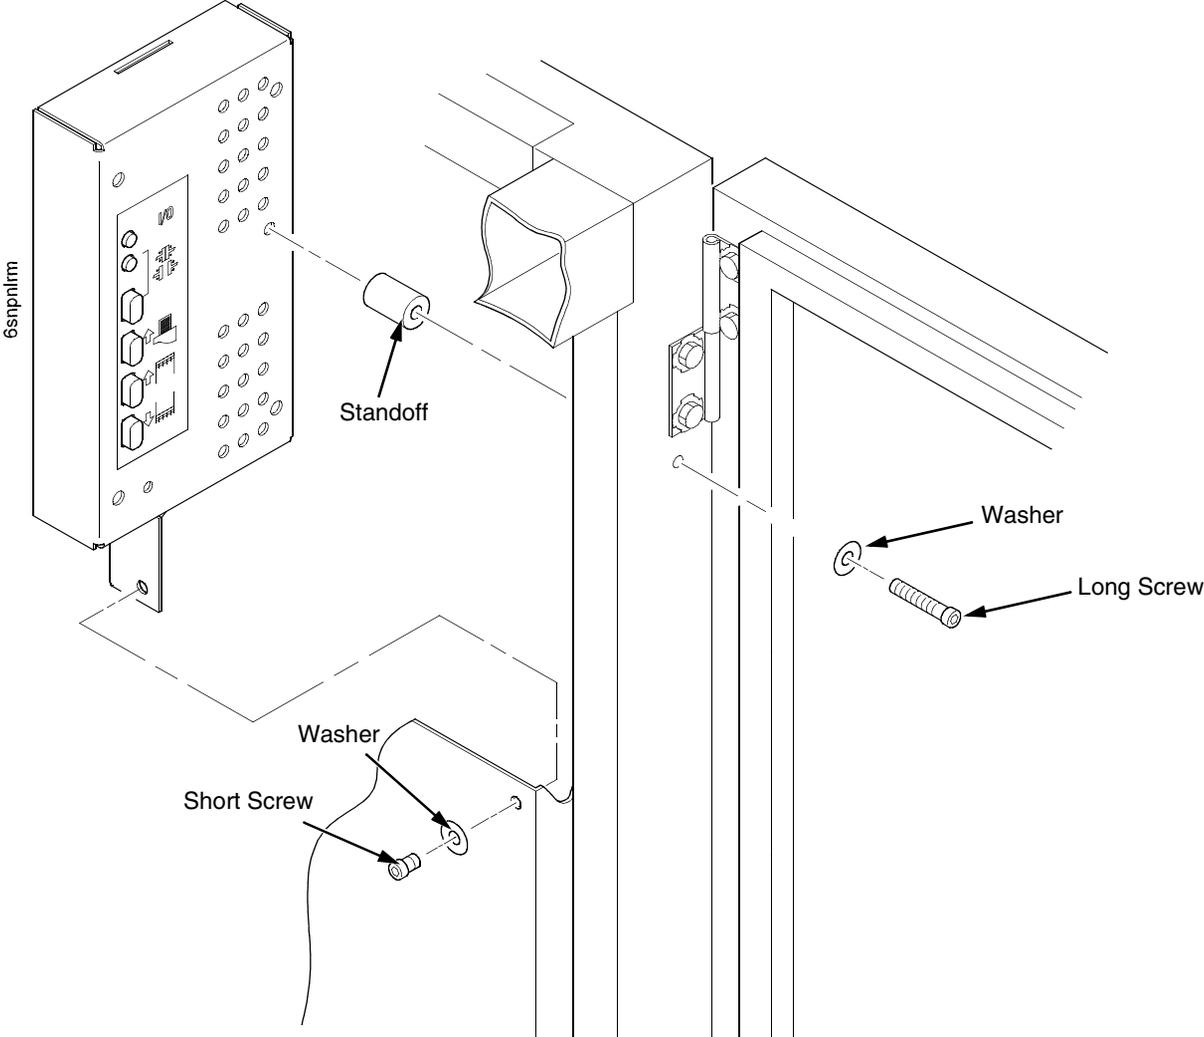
This figure shows how to remove an early stacker operator panel from the cabinet frame.
